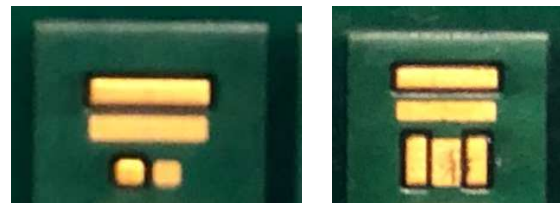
Manufactured 2-terminal (left) and 3-terminal (right) test fixtures.
